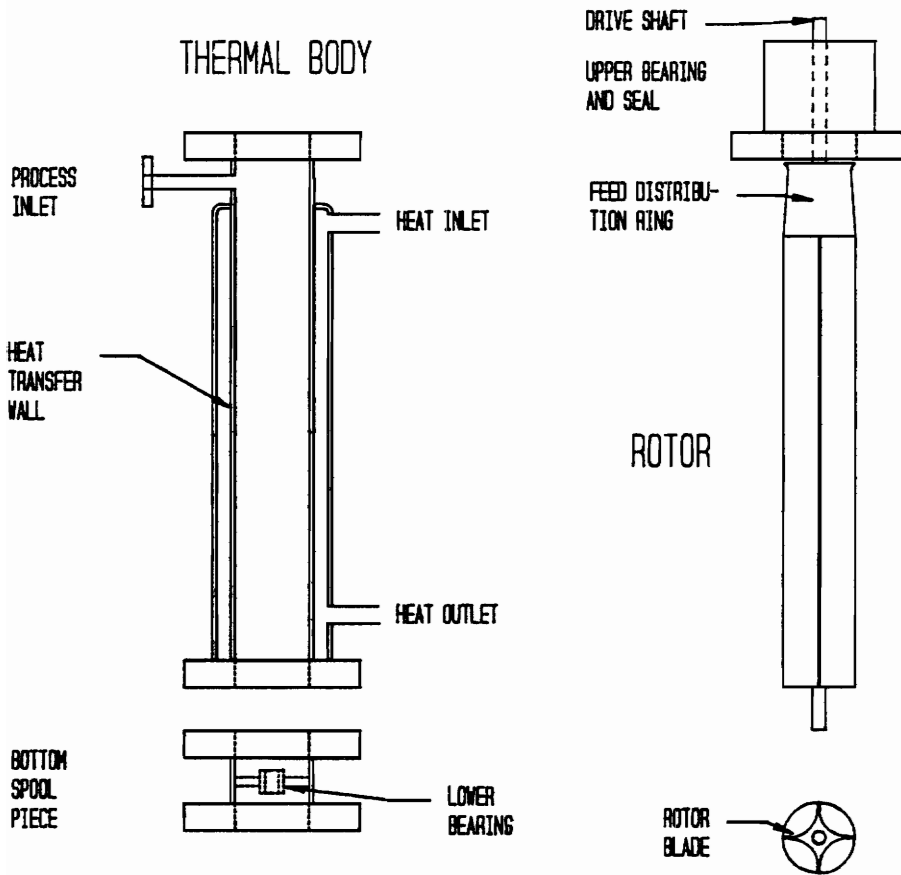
A scaled layout drawing of the experimental processor. The upper and lower bearings align the rotor shaft and maintain the rotor clearance. The feed distribution ring spreads entering process fluid uniformly around the heat transfer tube.
